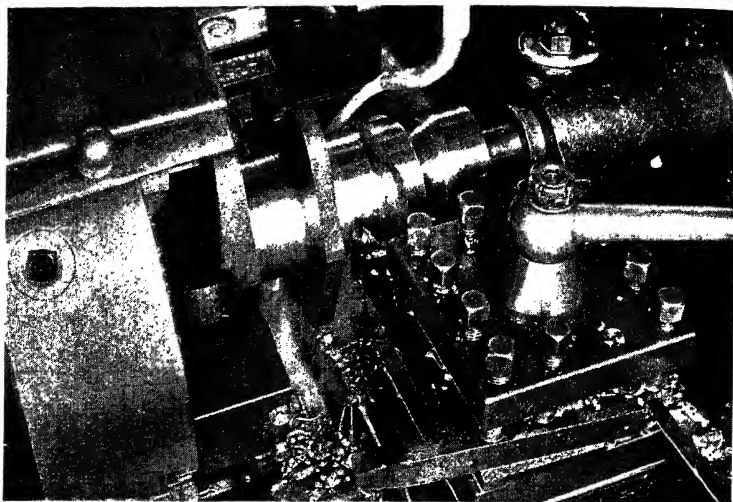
PRODUCTION OF LARGE MACHINED FITTING ON NO. 8 WARD LATHE (3).
